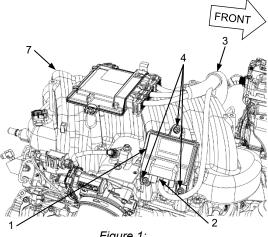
TSM (1), Engine Harness TSM Electrical Connector (2), Engine Harness (3), TSM Mounting Bolts (4), Upper Intake Manifold (7)
